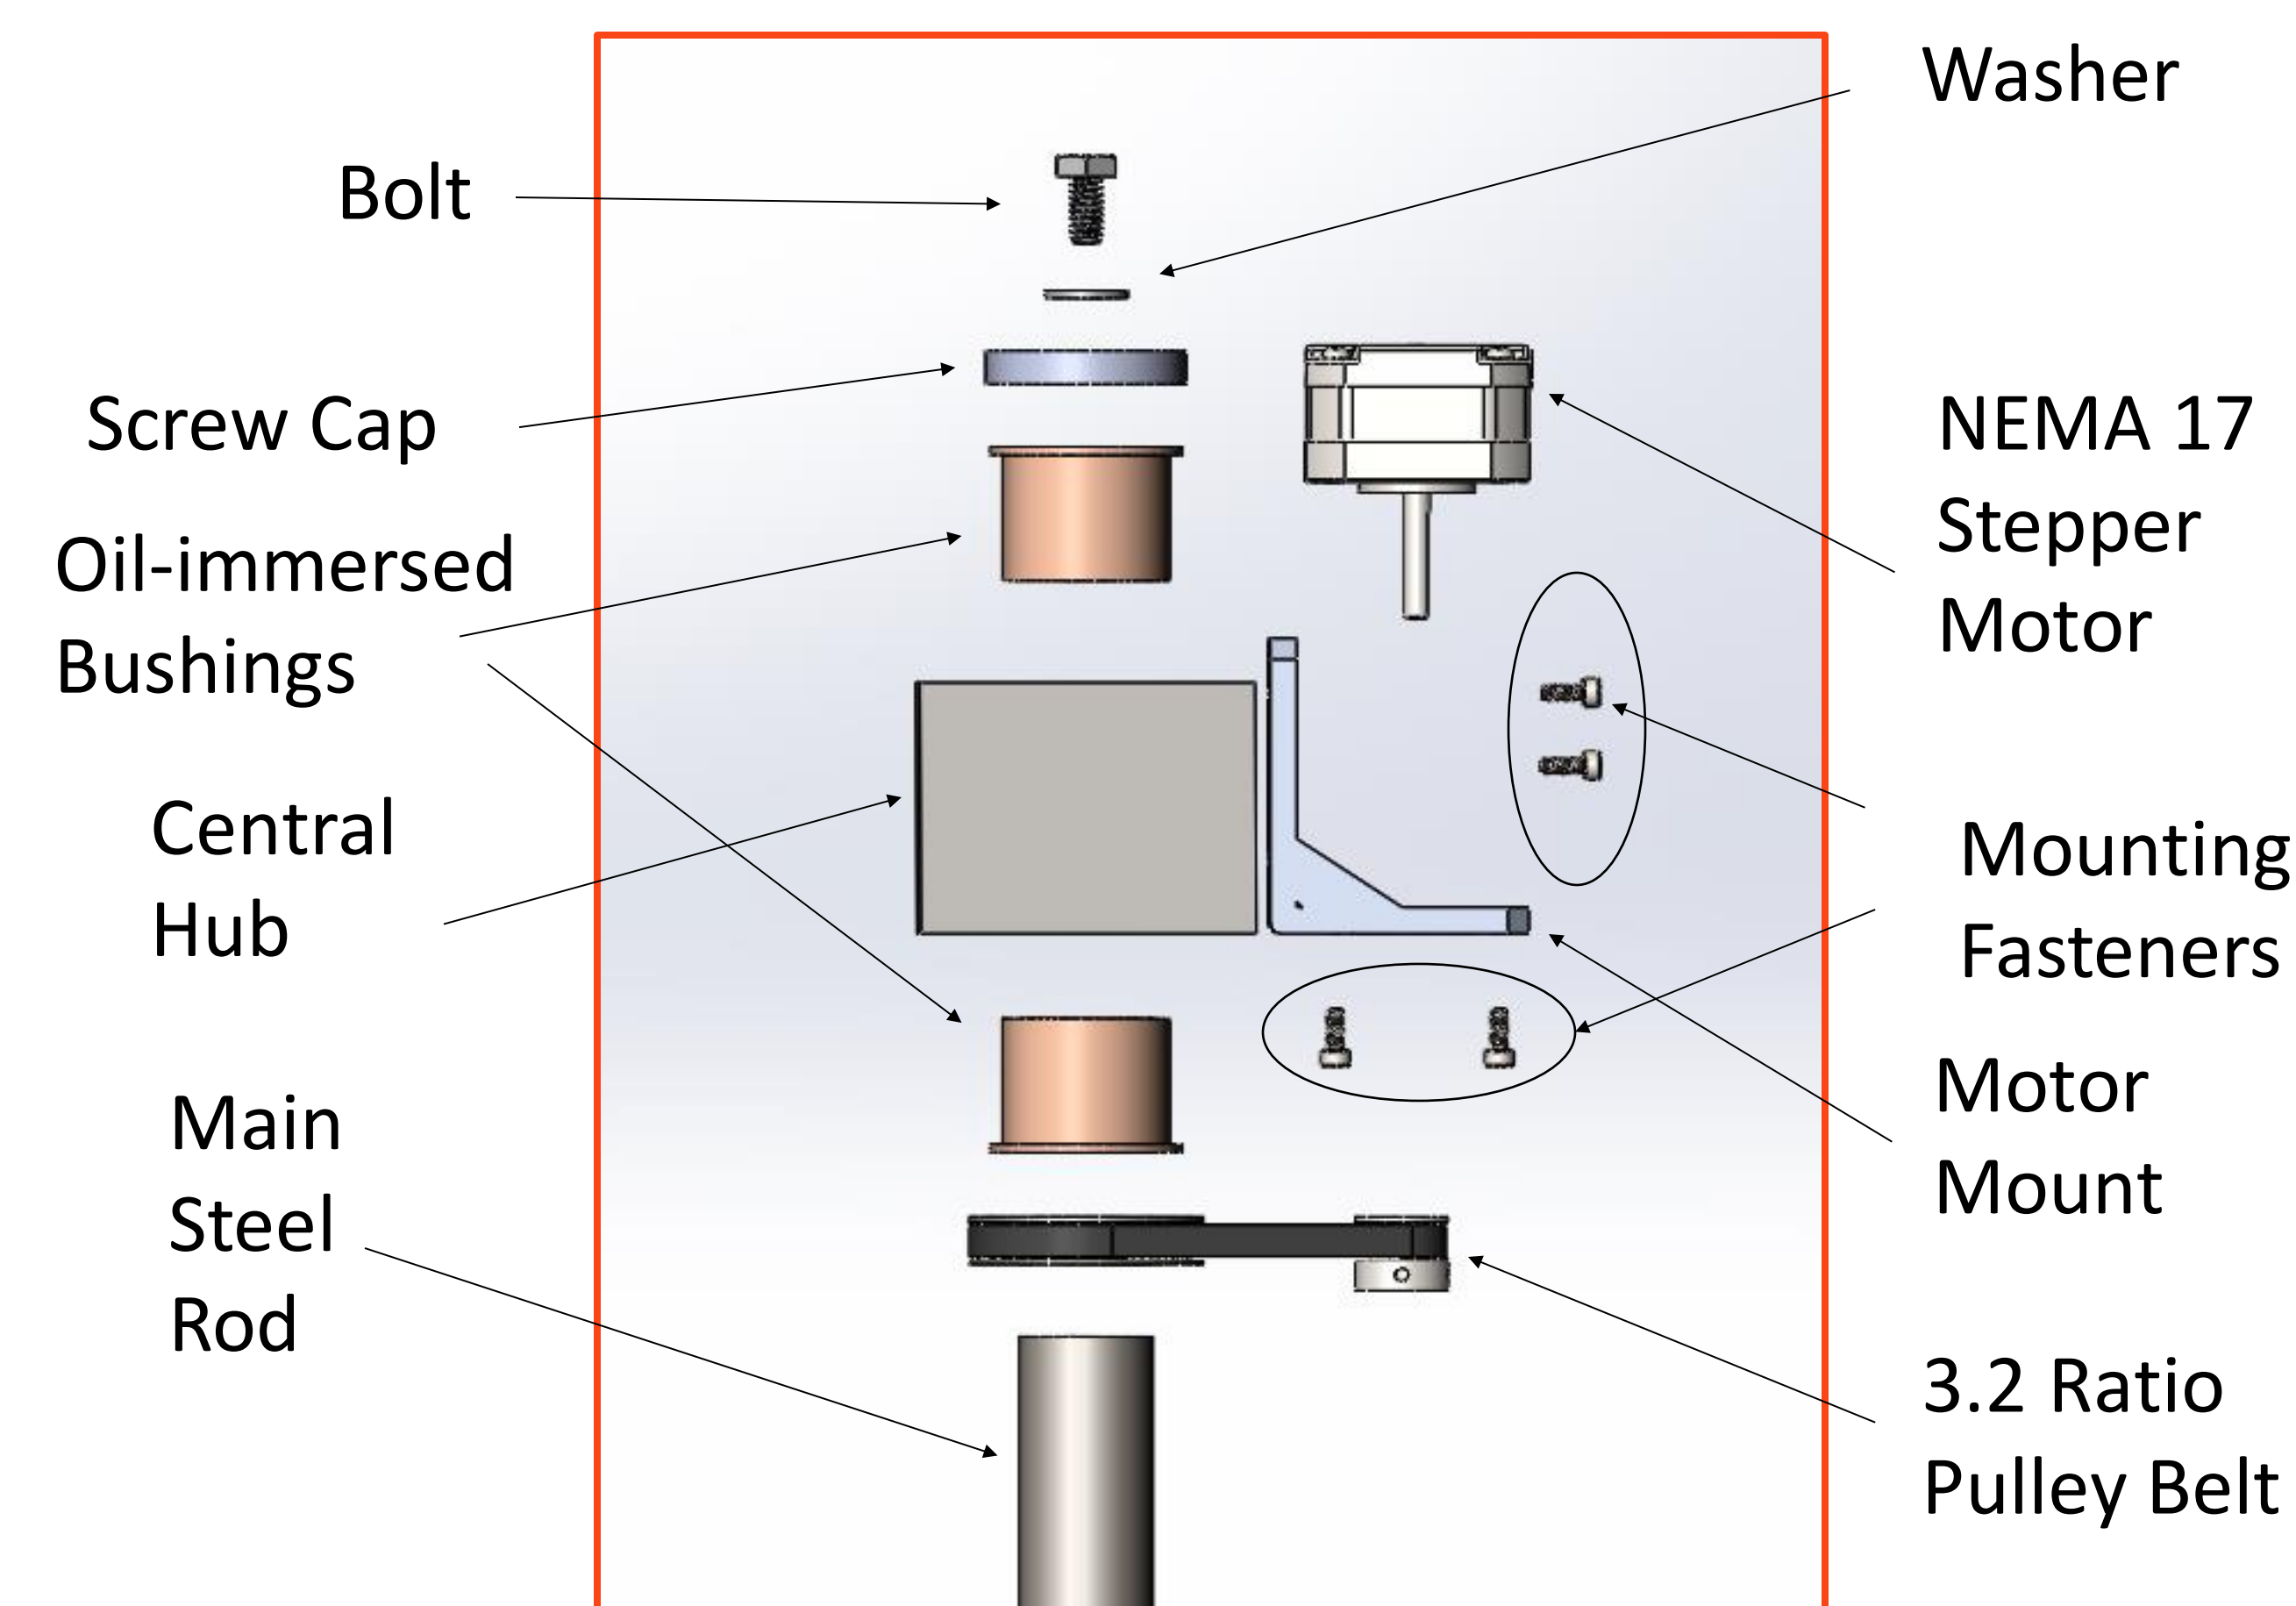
Exploded view of central hub driver system to rotate in the azimuth angle
